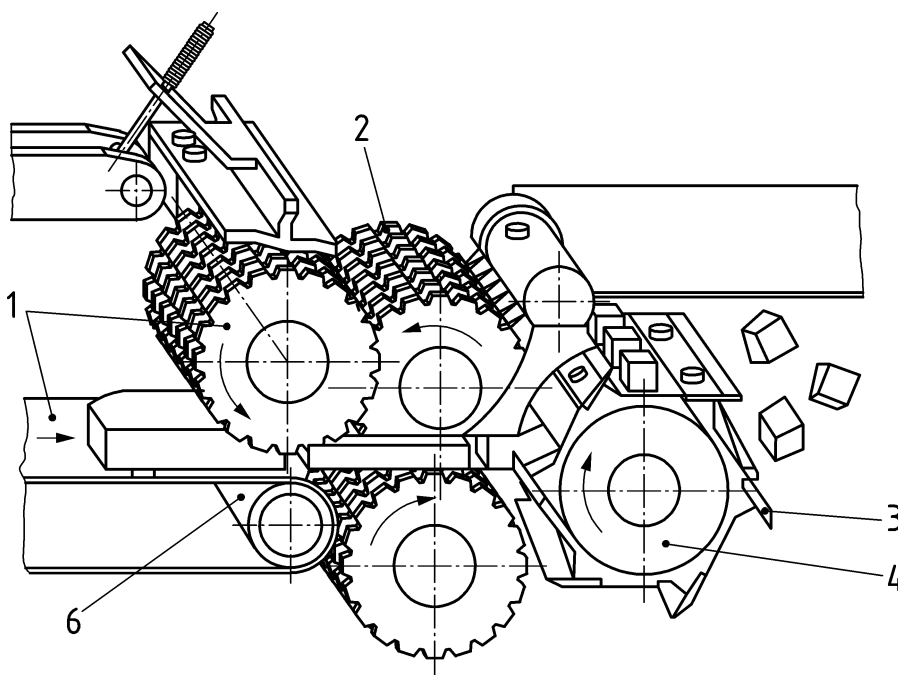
Danger zones on cubes cutting machine with feed intake chamber/magazine and loading by hand
